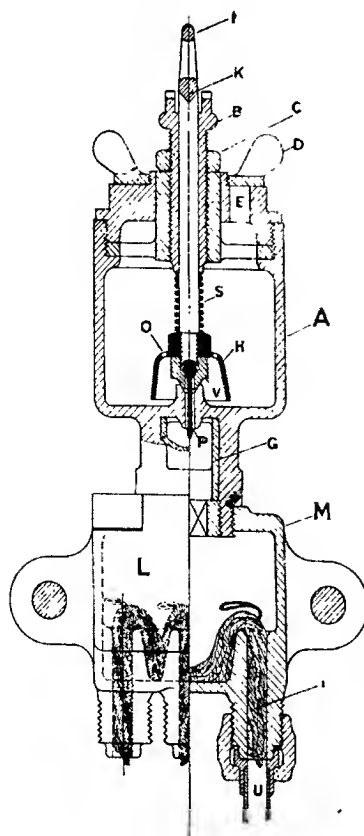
Combined Sight Drop-feed and Siphon Lubricator.
